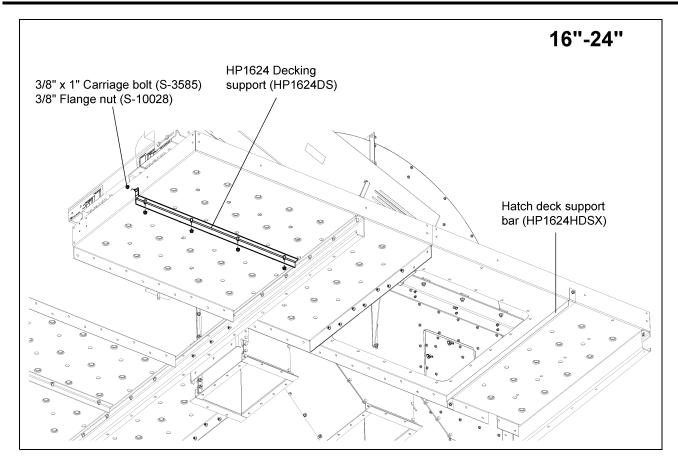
G Deck C HP Deck Support as Viewed from Underneath.
